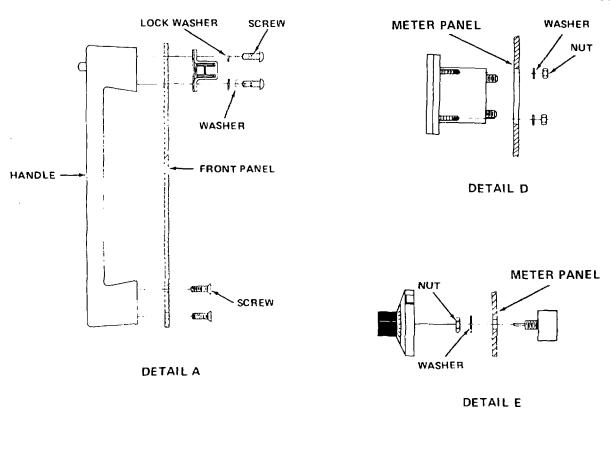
Sideband Transmitter Front Panel and Chassis-Mounted Parts Location Diagram (Sheet 2 of 3)
